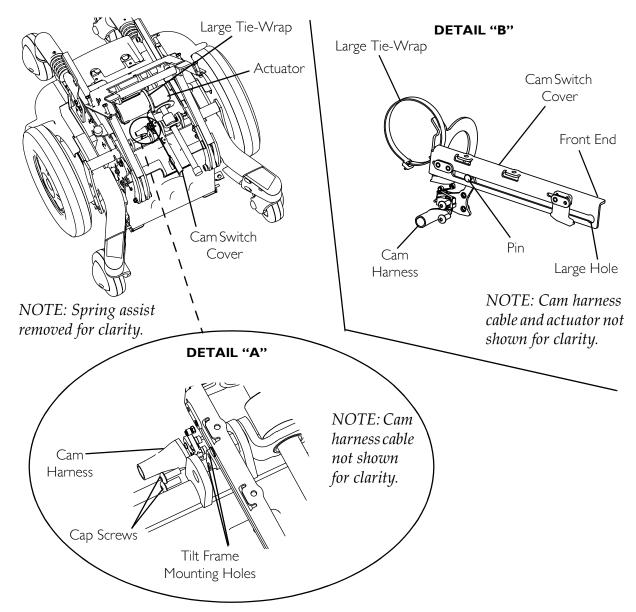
Removing/Installing the Cam Switch Cover/Removing/Installing the Cam Harness Cable
